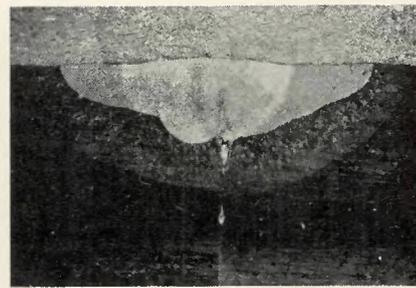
Cross section of a weld containing 6,785 ppm iron
